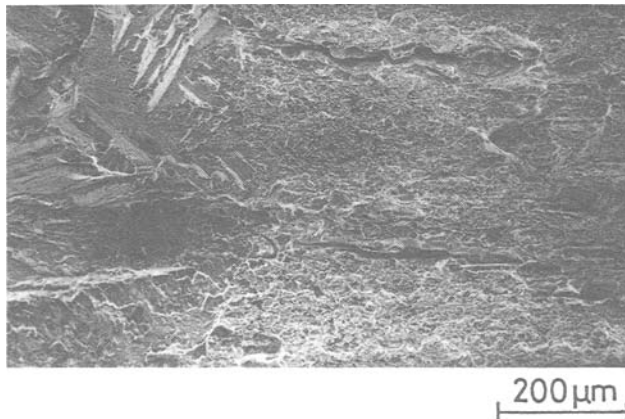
The microscopic fracture surface in Al-Li alloy.
